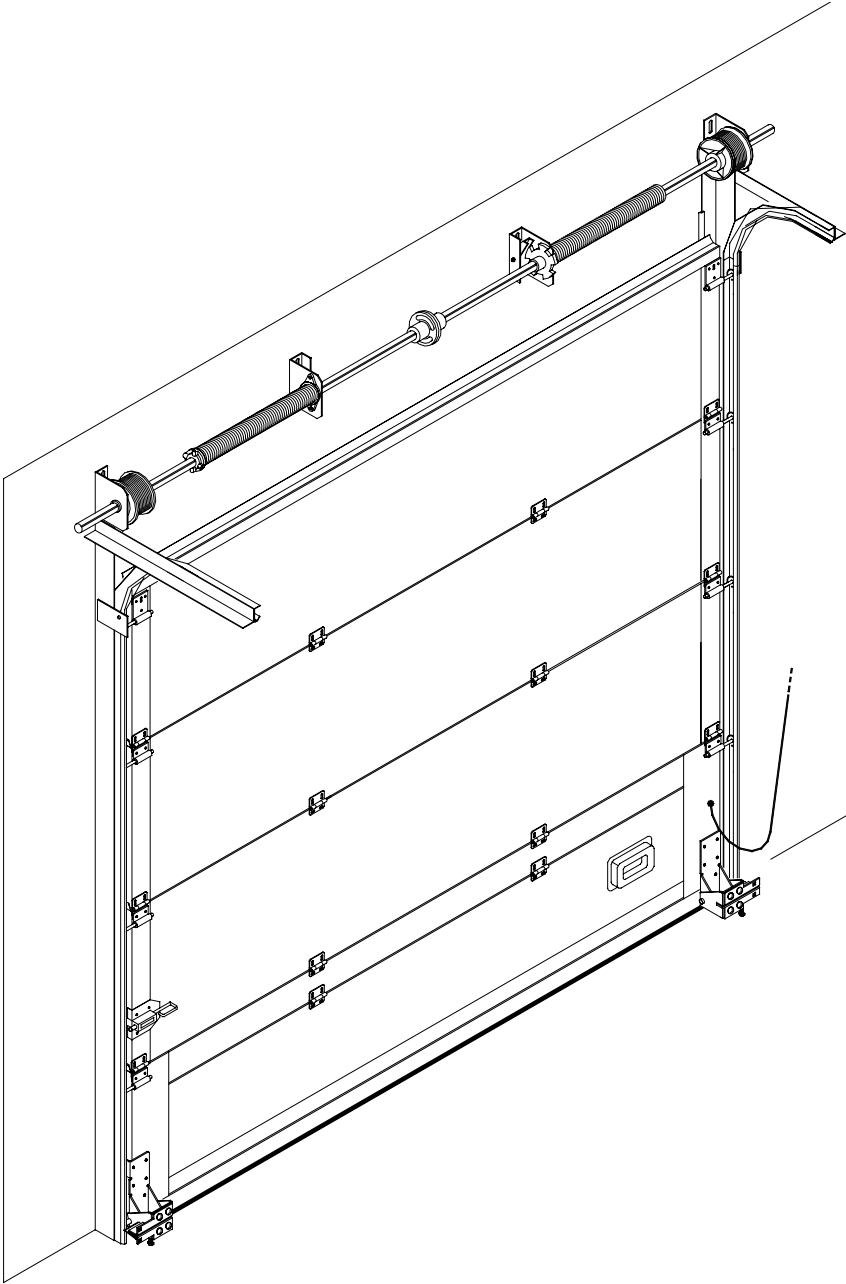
FINAL DRAWING OF AN ASSEMBLED DOOR
